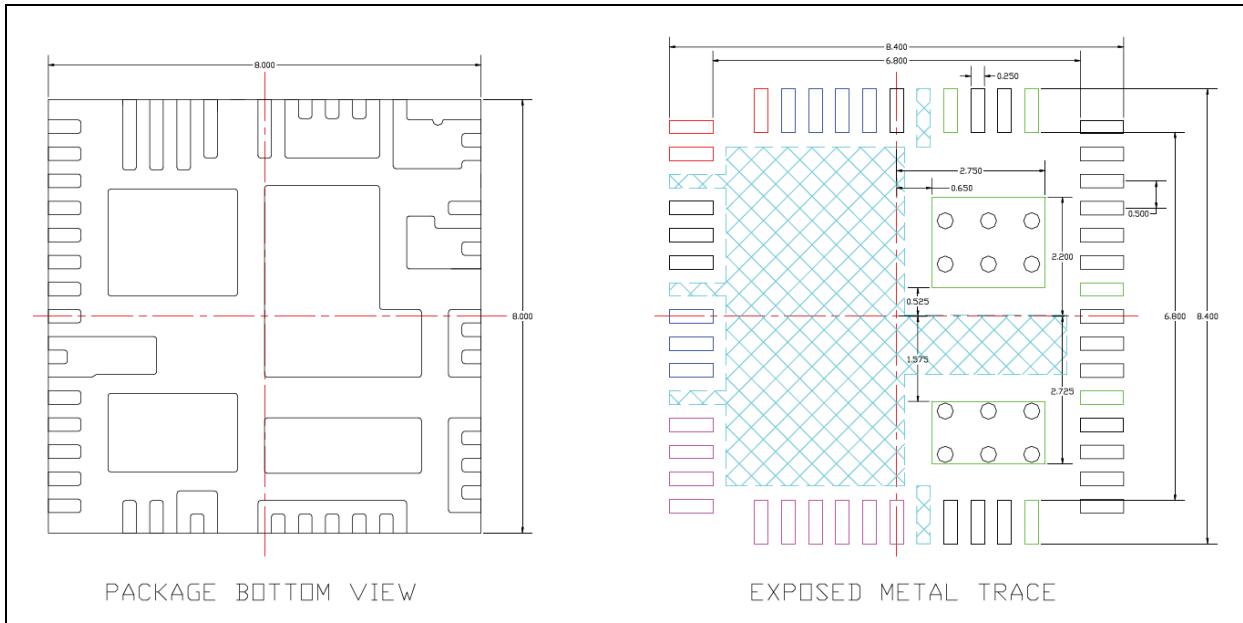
Package Bottom View vs. PCB Recommended Exposed Metal Trace.
